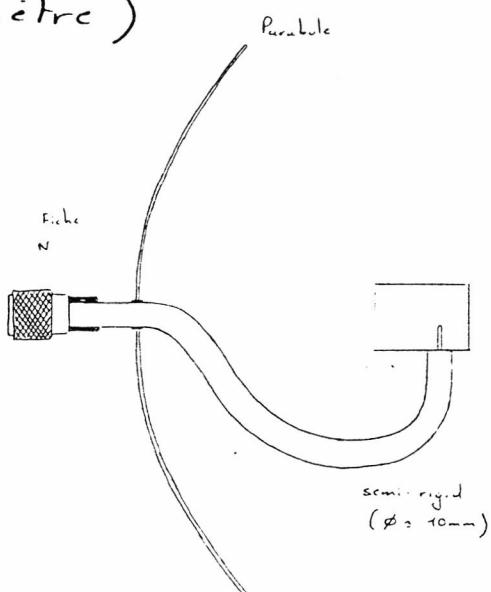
5.7GHz feed horn. Although an N-type socket is shown, an SMA socket could equally well be used
